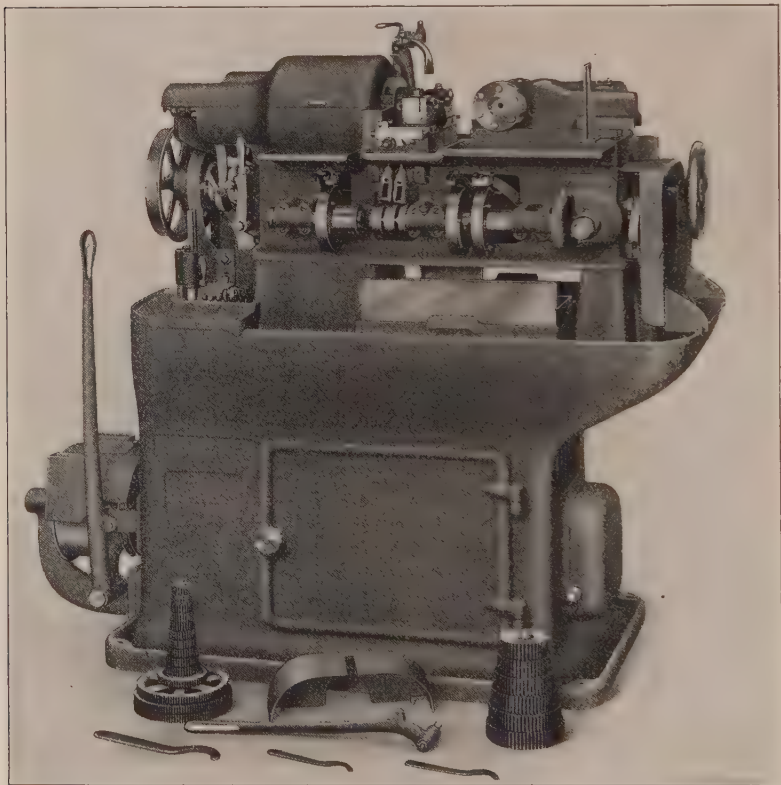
Brown & Sharpe Automatic Screw Machine. This design has Single-Pulley Drive, all the various connections for Speed Changing, Reversing, etc., being contained in the Base instead of in a complicated Overhead Countershaft.
